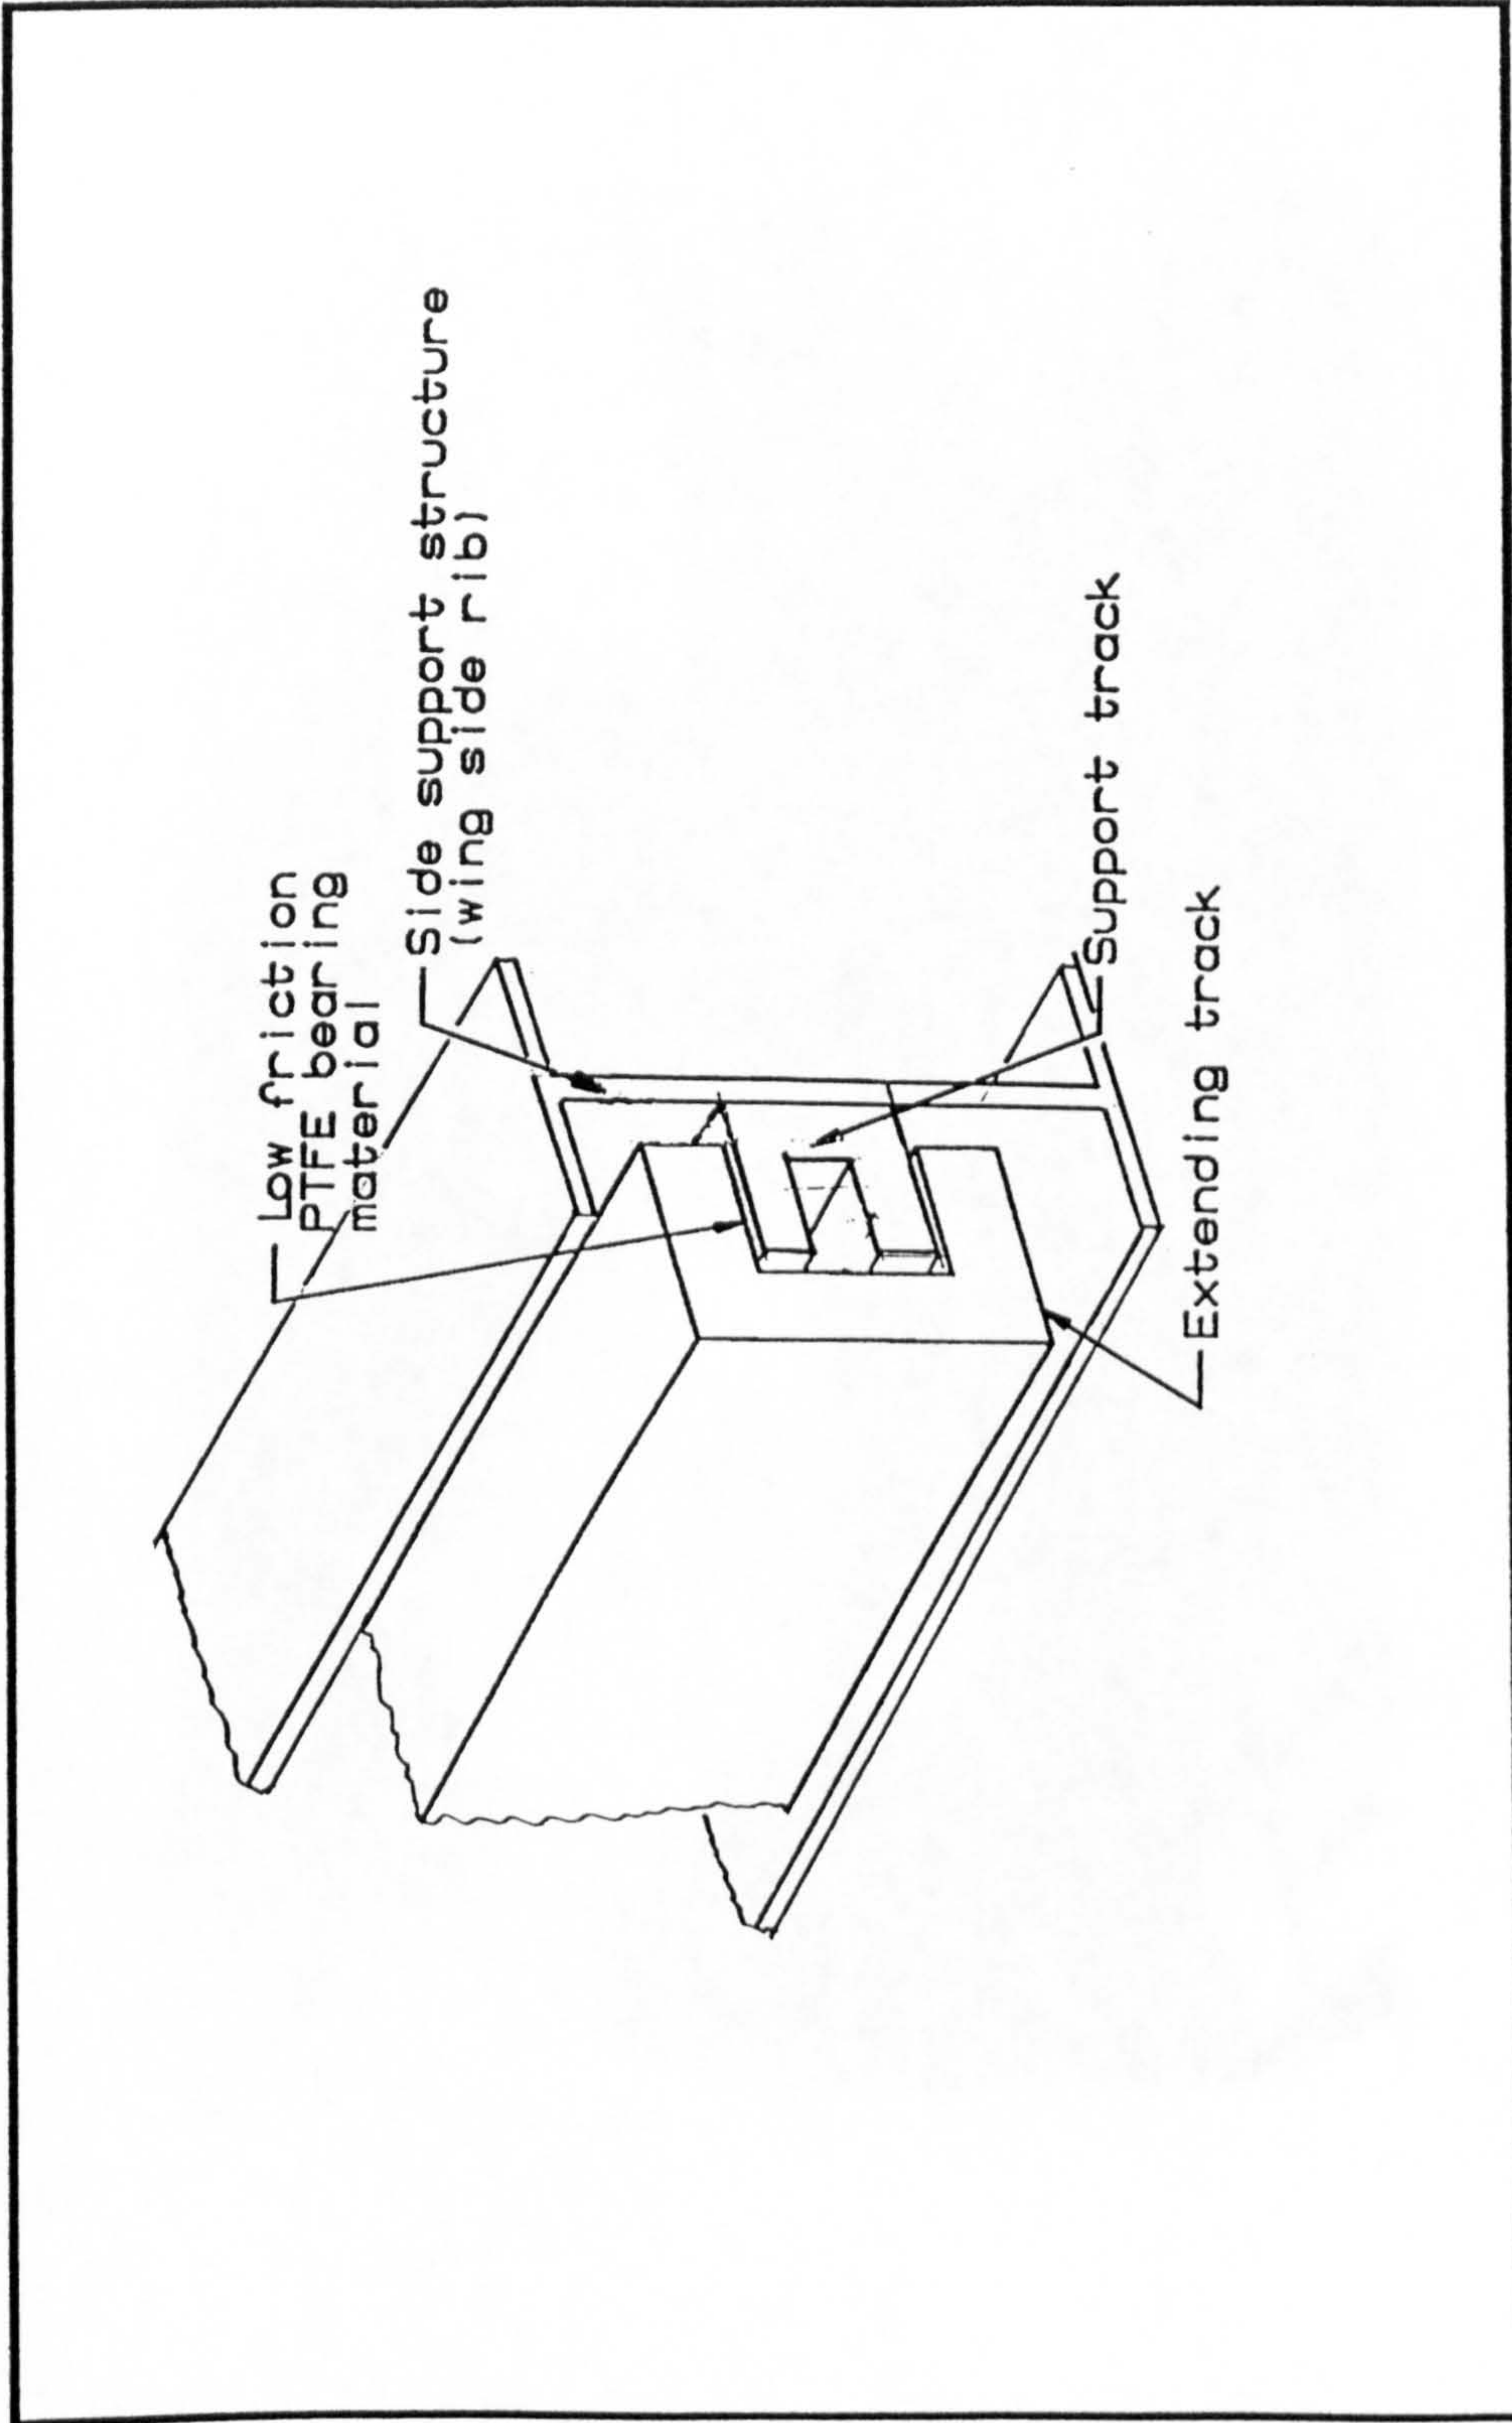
Track cross-section with PTFE providing the sliding and bearing properties
